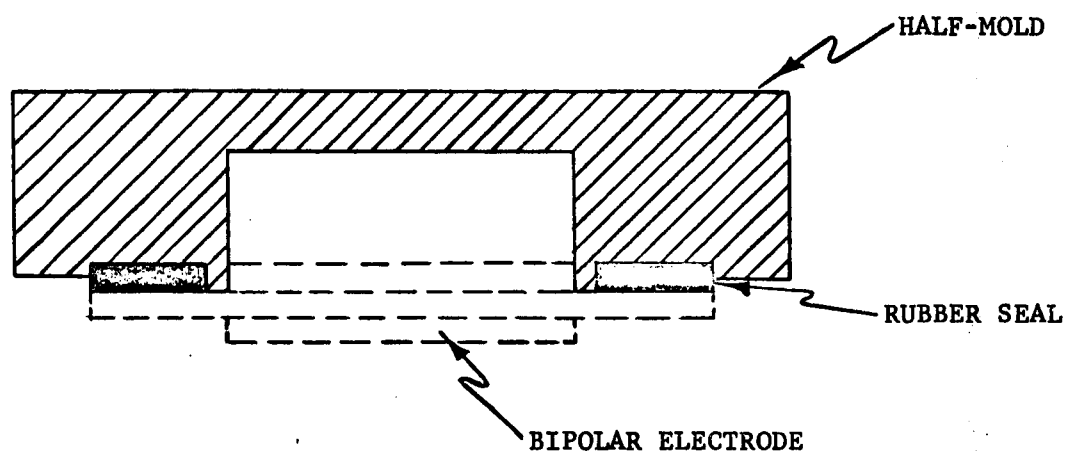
HALF-MOLD FOR VULCANIZING RUBBER SEAL
